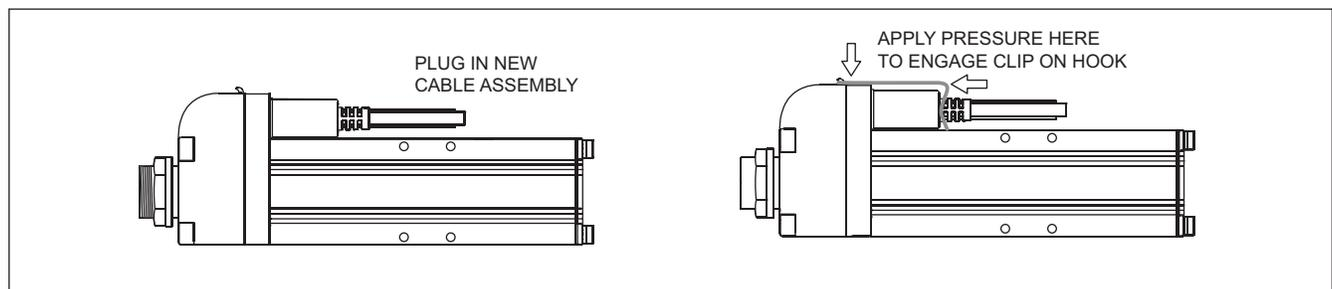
(left) Plugging in the new cable assembly and (right) fitting the retaining clip.
